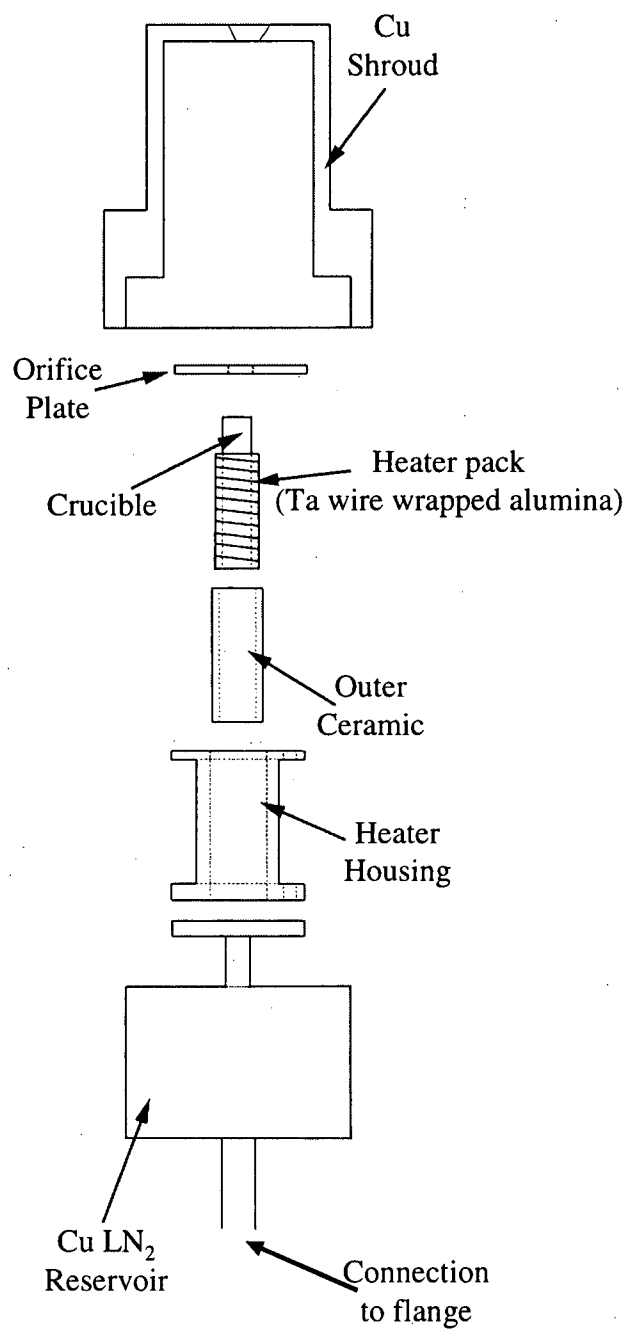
Exploded side view of the Knudsen cell used in all the experiments
